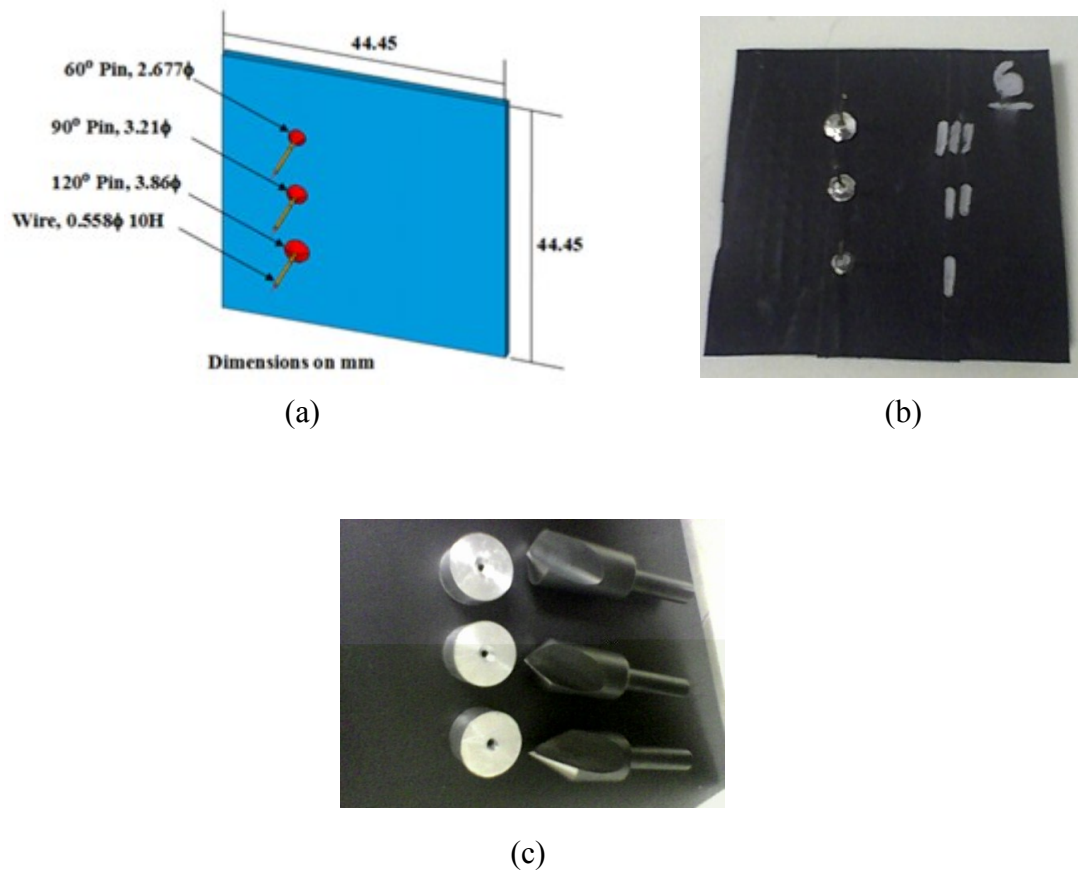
Schematic of the Board. (a) Dimensions, (b) actual board, (c) and molds. (Dimensions are in millimeters. ϕ and H means diameter and height, respectively)
